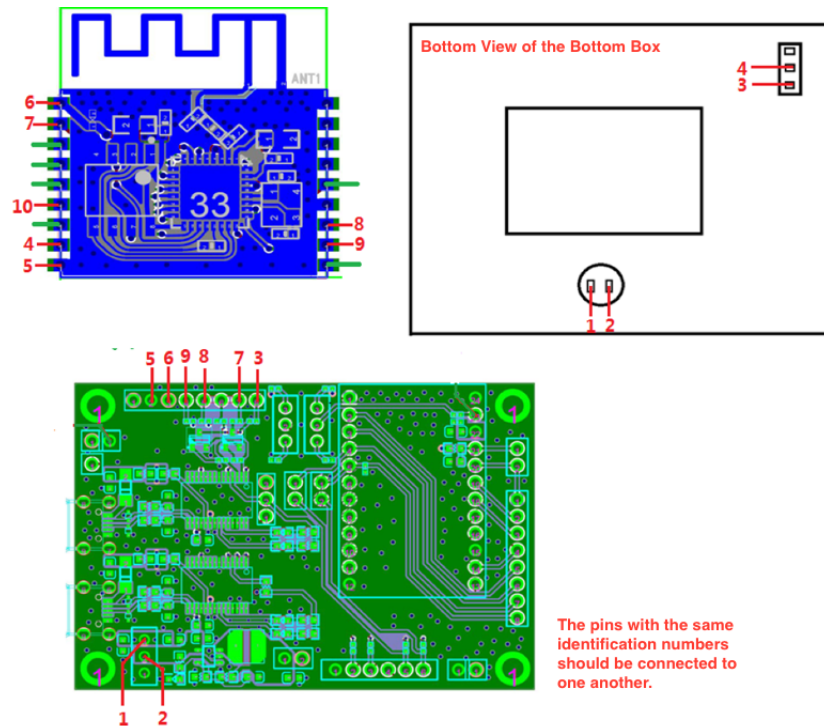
The Wiring of the ESP-WROOM-02 Fixture
